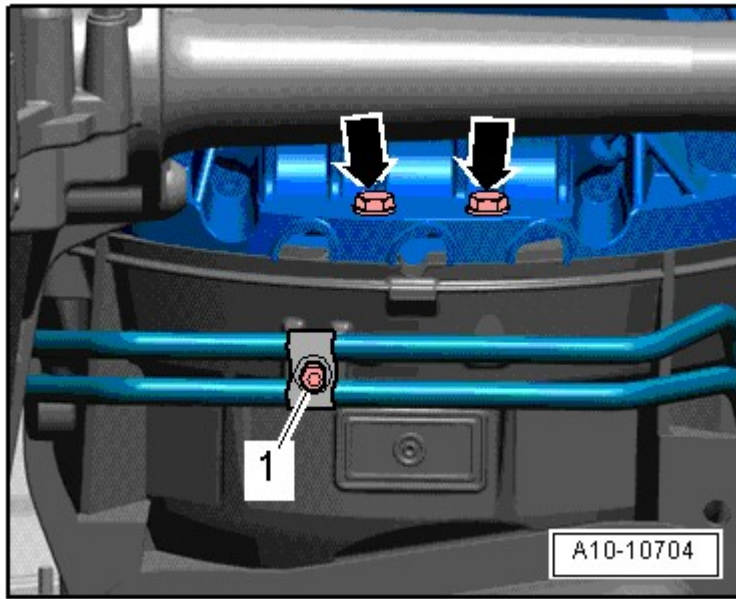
Identifying Lower Bolts -Arrows- For Engine To Transmission Connection
